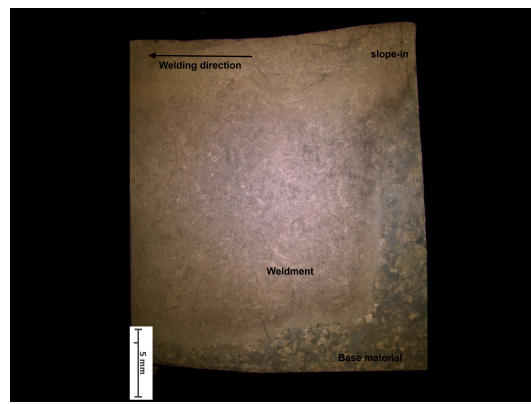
MTP,butt weld E [Adler]:longitudinal cut, no pores or cracks were visible across the first half of the weld seam, full penetration was not achieved along the complete weld length.
